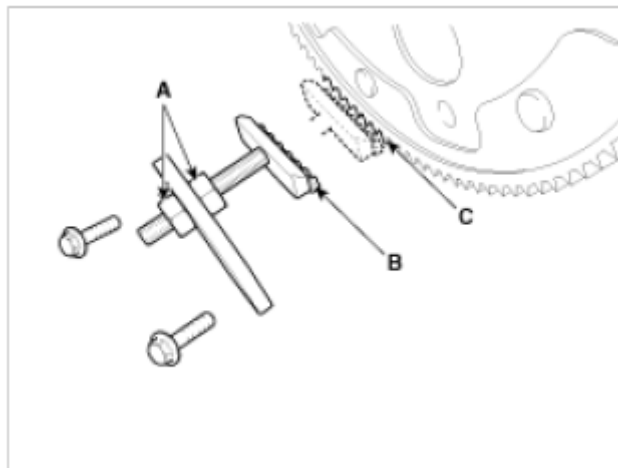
Holding Ring Gear Using SST (09231-3C300)
